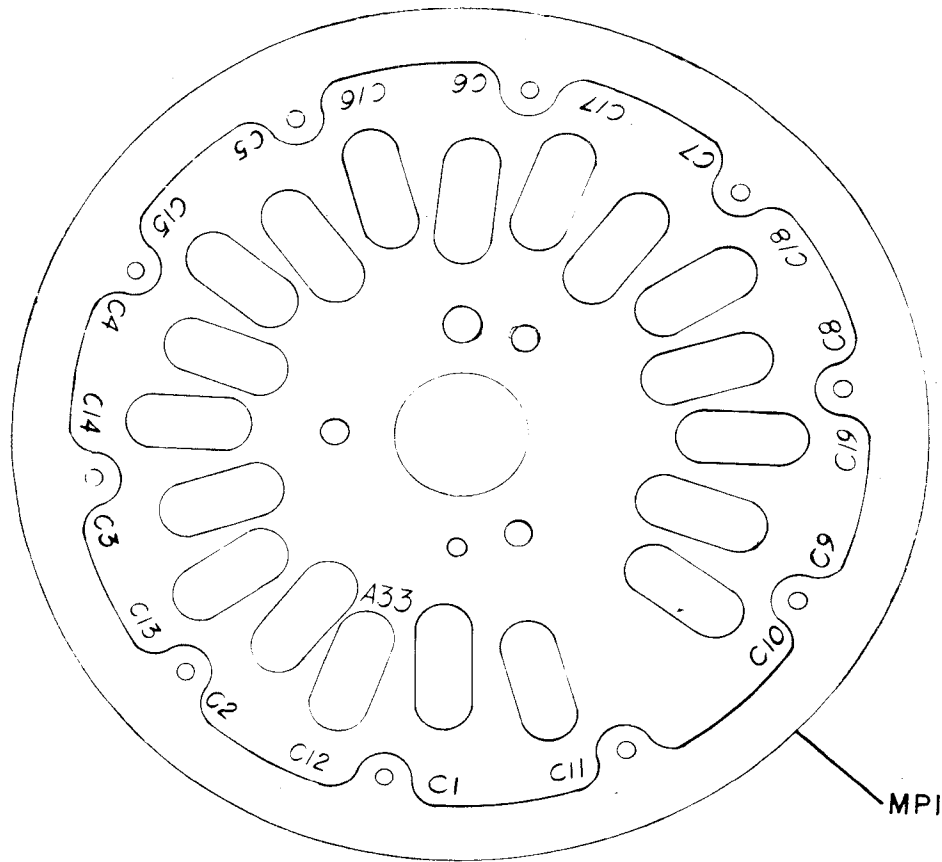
100 kHz Rotor Subassembly A2A4A33,
